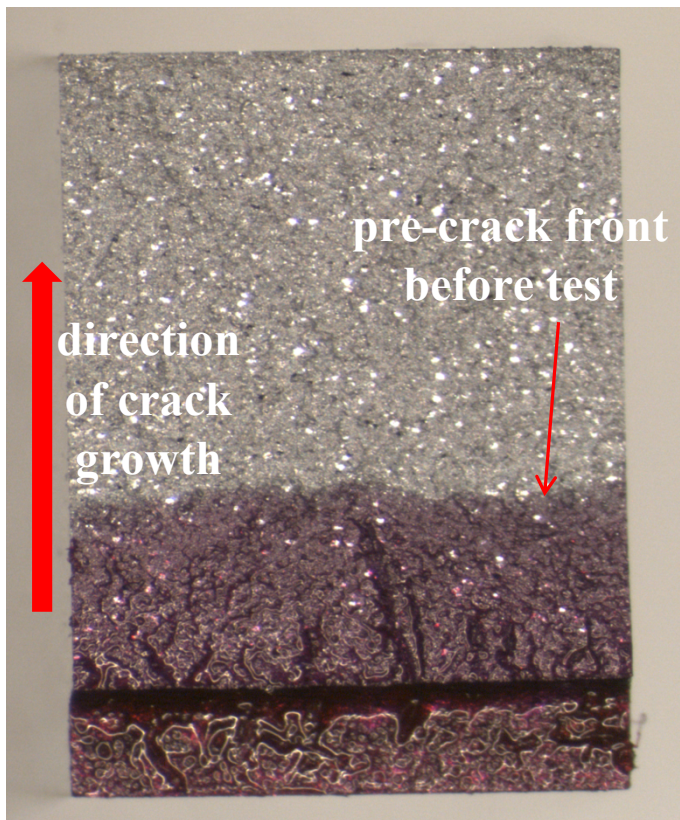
Dyed fracture toughness specimen after fracture.
